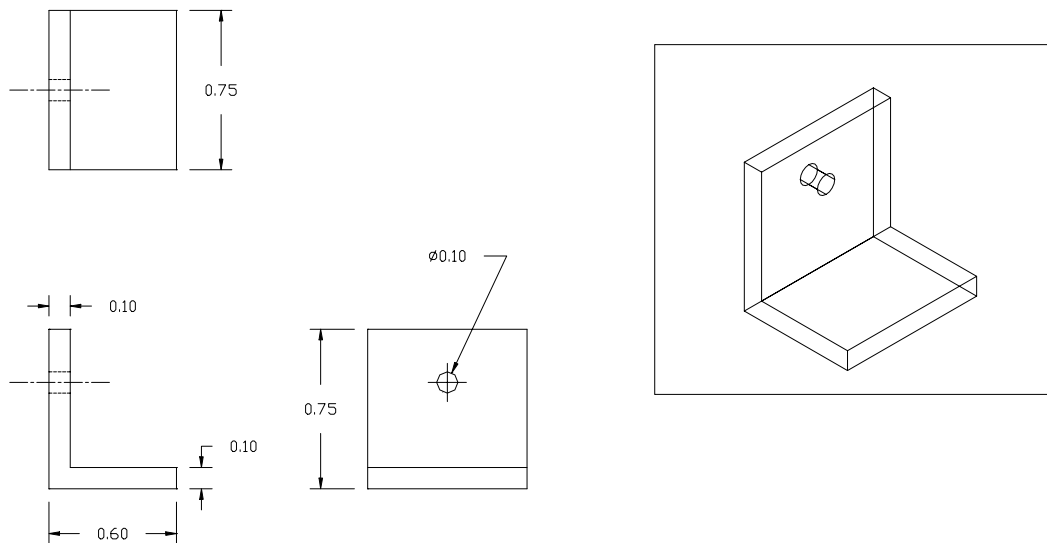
Elevation, top, plan, and 3D views of the aluminum bracket receiving the sensor. Dimensioning is in inches
